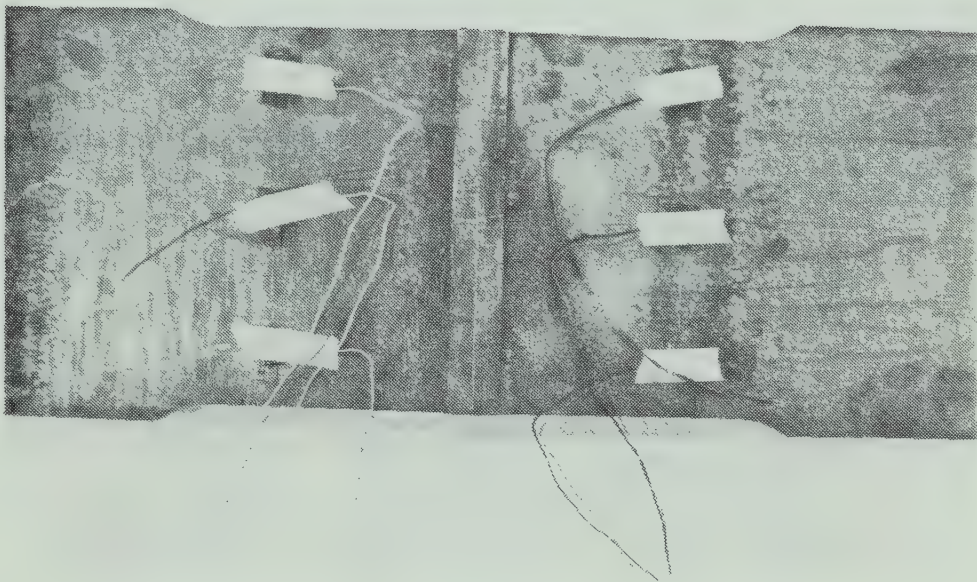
Typical Groove Weld with Backing Bar Specimen
